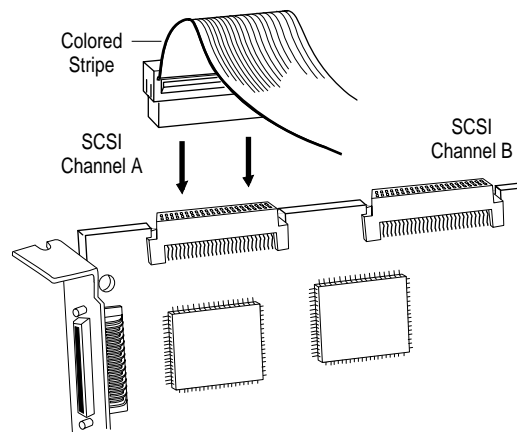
Attaching 68-pin Internal Ribbon Cable
